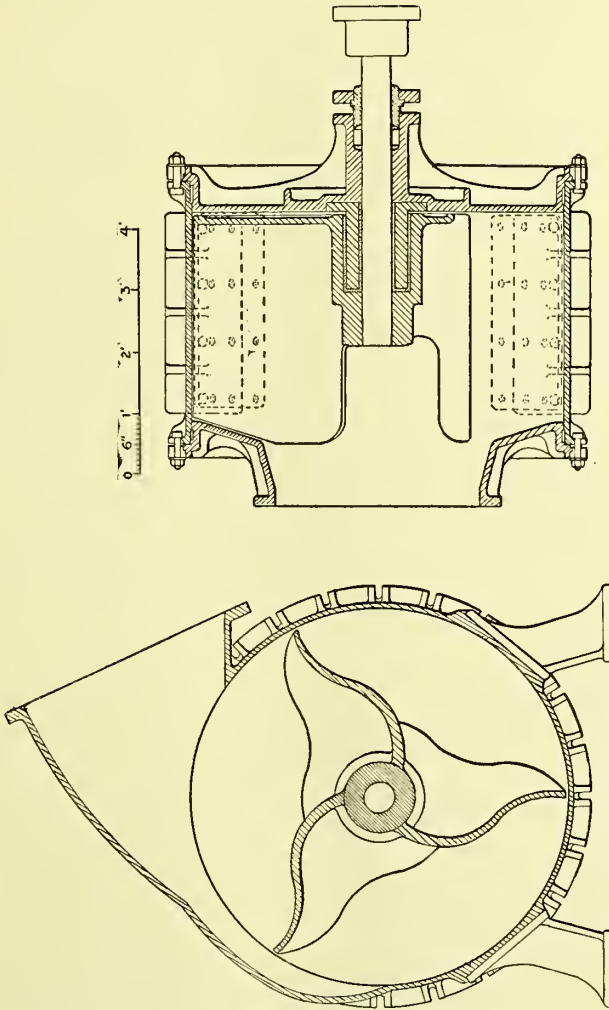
SECTION OF CENTRIFUGAL PUMPS, BRIDGEPORT.
